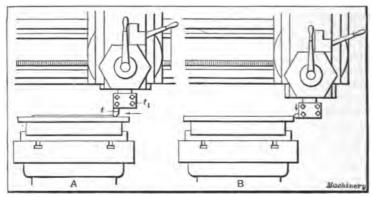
(A) Turning a Flat Surface. (B) Turning a Cylindrical Surface
